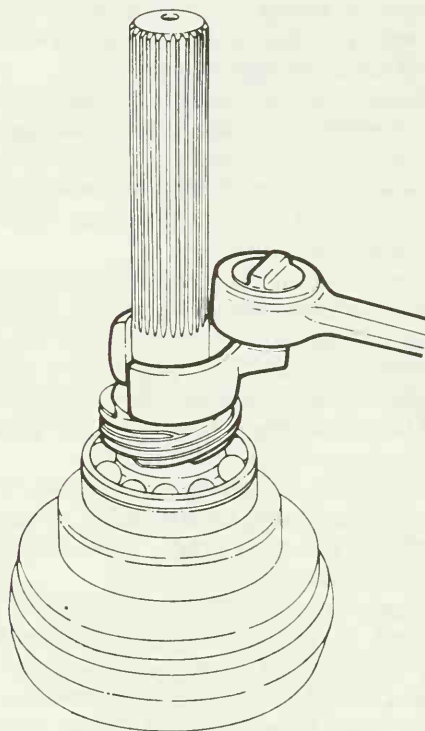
The speedometer gear locknut is removed with a special tool. (American Motors Corporation)
